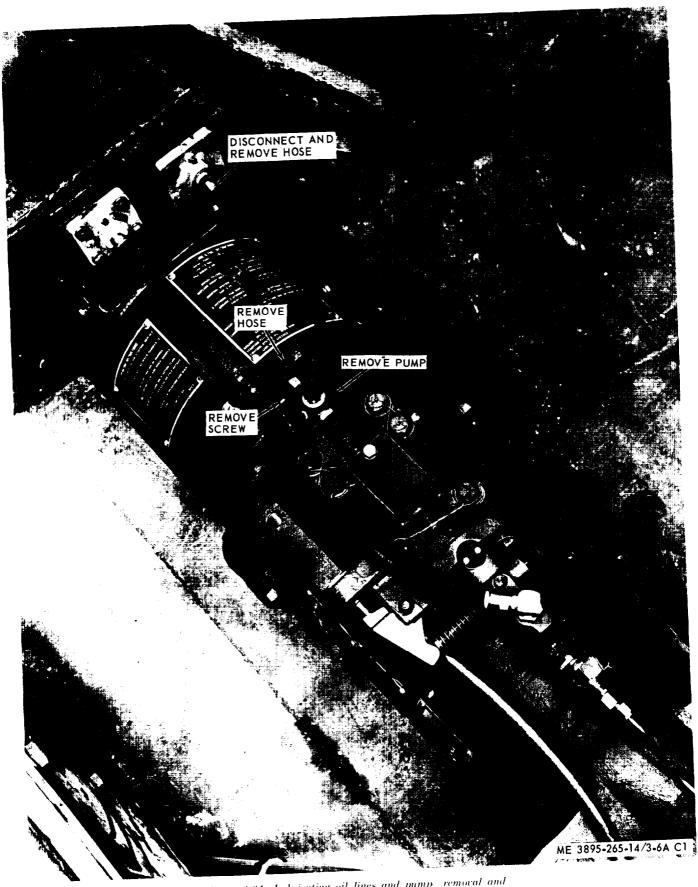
A. Lubricating oil lines and pump—removal and installation (SN 180M 3001 through 180M-3170).
